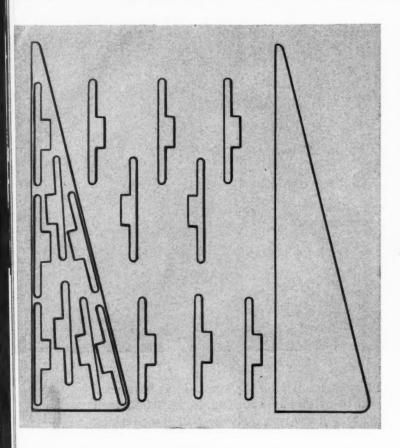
Scrap Strip (Left) Produced in Stamping Eight Rear-fender Door Hinges from Front-fender Salvage Shown at Right
